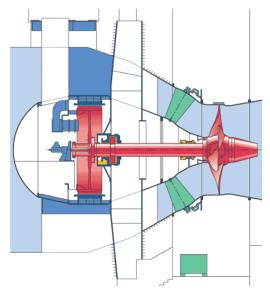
Cutaway schematic of the horizontal bulb-type turbine.
